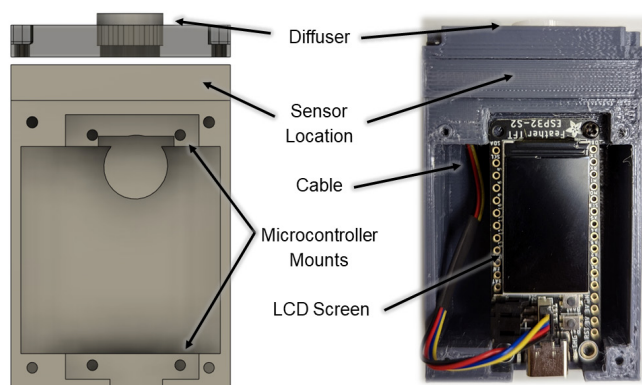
CAD drawing of case and 3D printed prototype of device equipped with AS7341 sensor.
